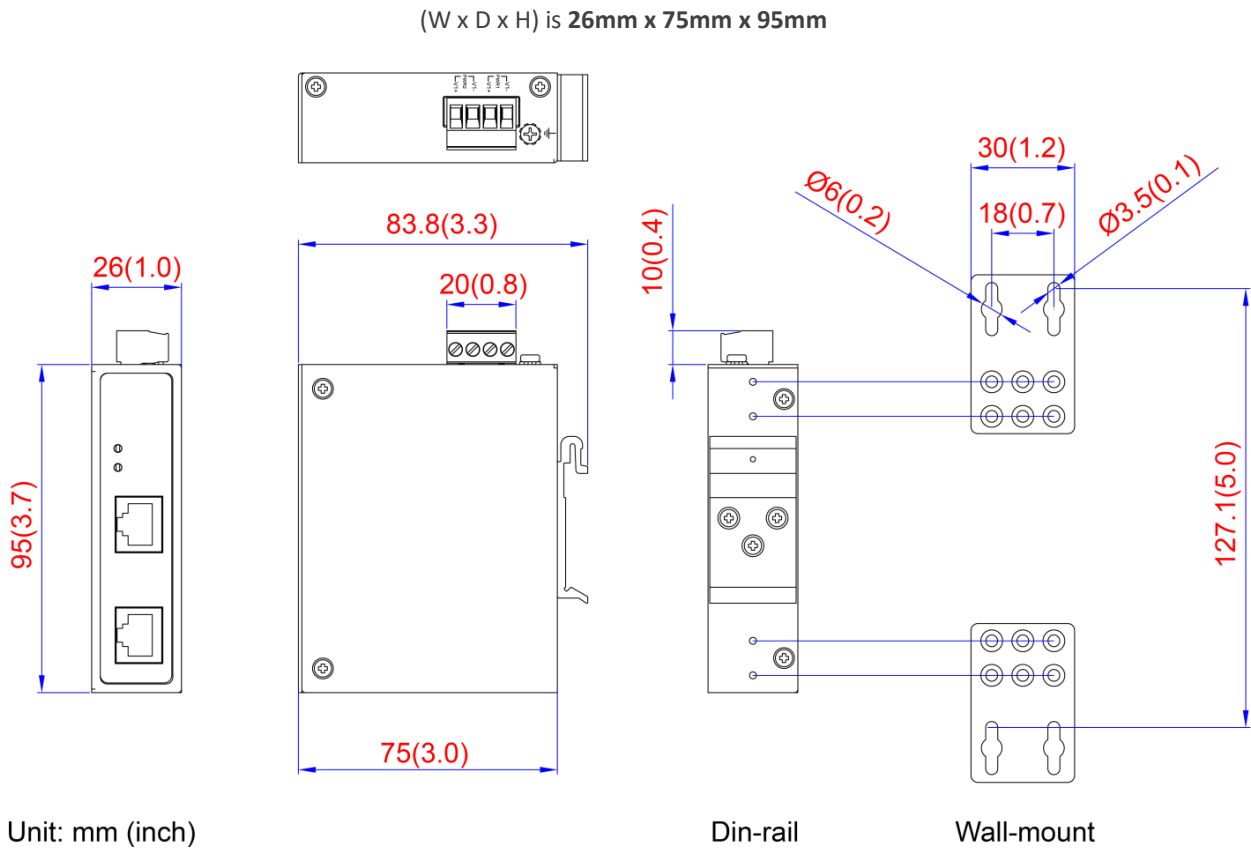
WINJ-0201-30W-24 Series Physical Dimensions
